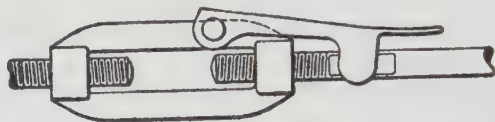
TURNBUCKLE ADJUSTMENT FOR BRAKE ROD.
